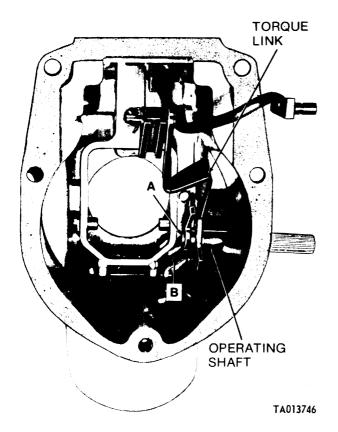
Engaging operating shaft bearing to fulcrum lever (code A pumps).
